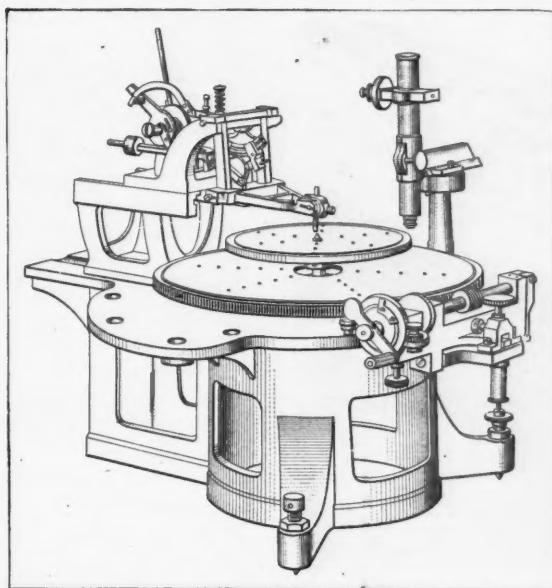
Hand-operated Circular Dividing Engine or Graduating Machine
